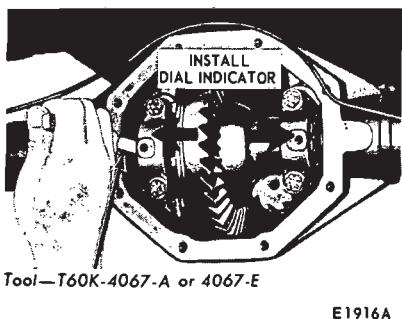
Backlash and Bearing Pre-Load Adjustment
